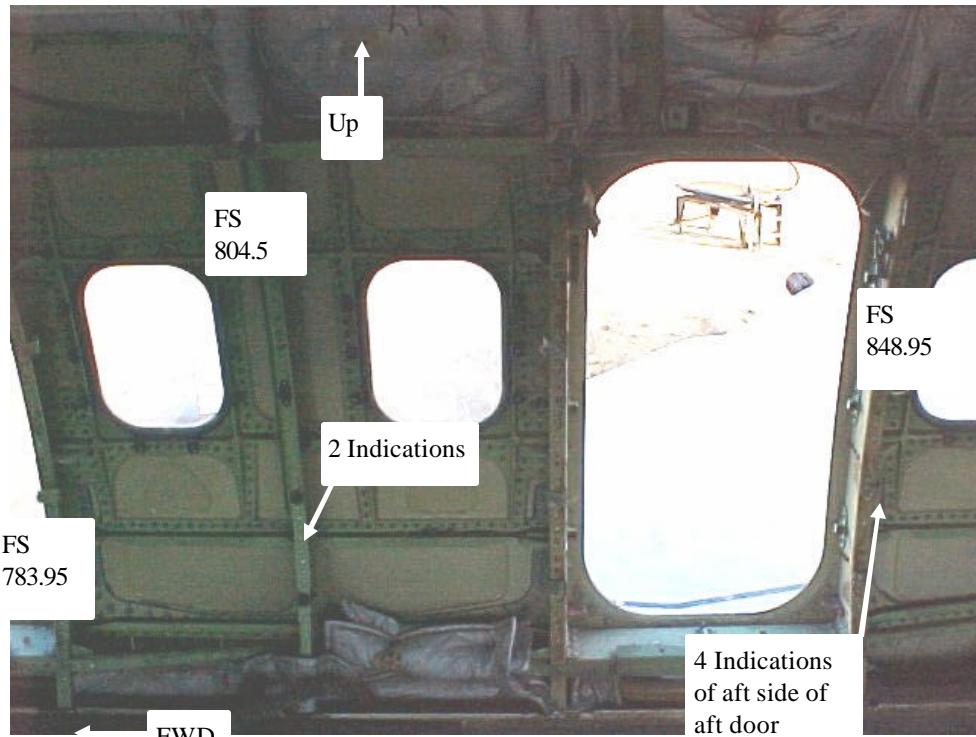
Photograph of right side overwing emergency exit doors. Detailed visual inspection discovered six indications.
